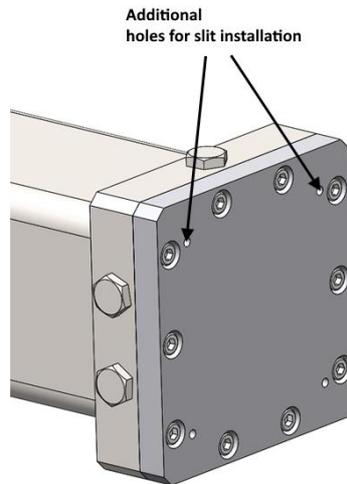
Closeup view of the downstream window showing the threaded holes for slit mounting.
